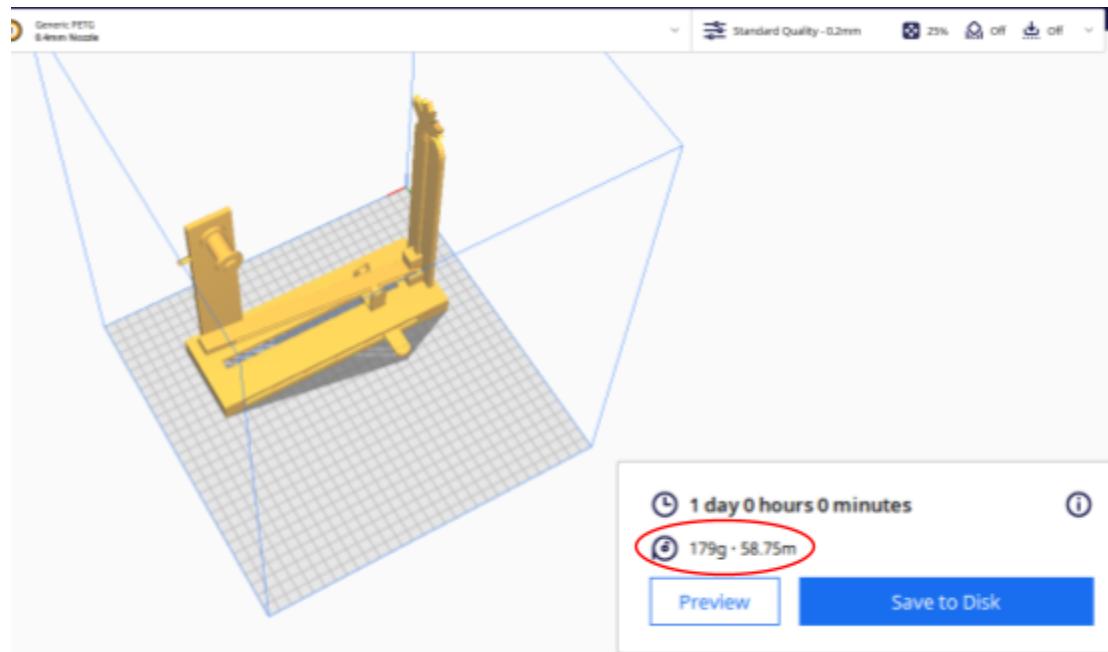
Weight of CAD High-Striker Design. Adapted from [34].
